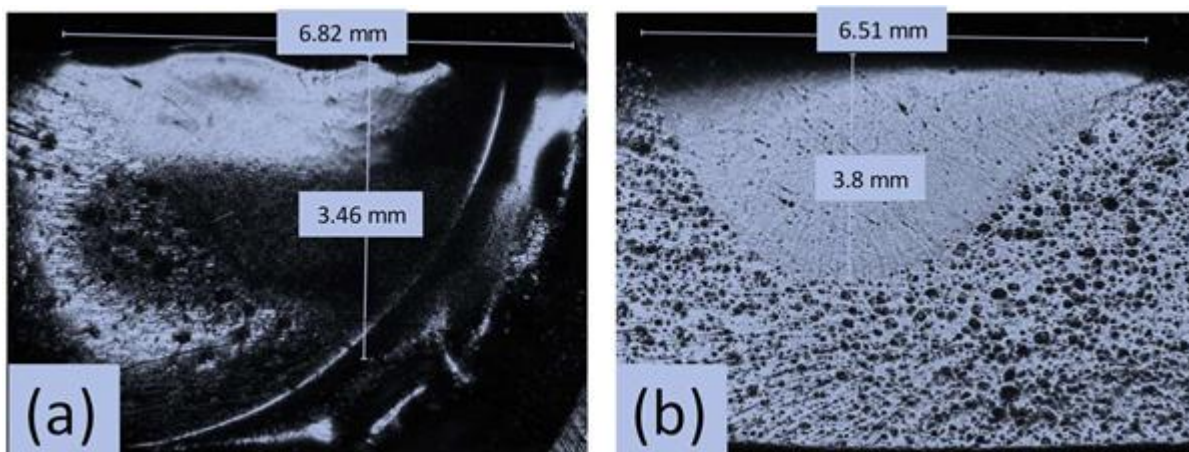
Influence of welding process (a) TIG and (b) ATIG on weld bead profiles
